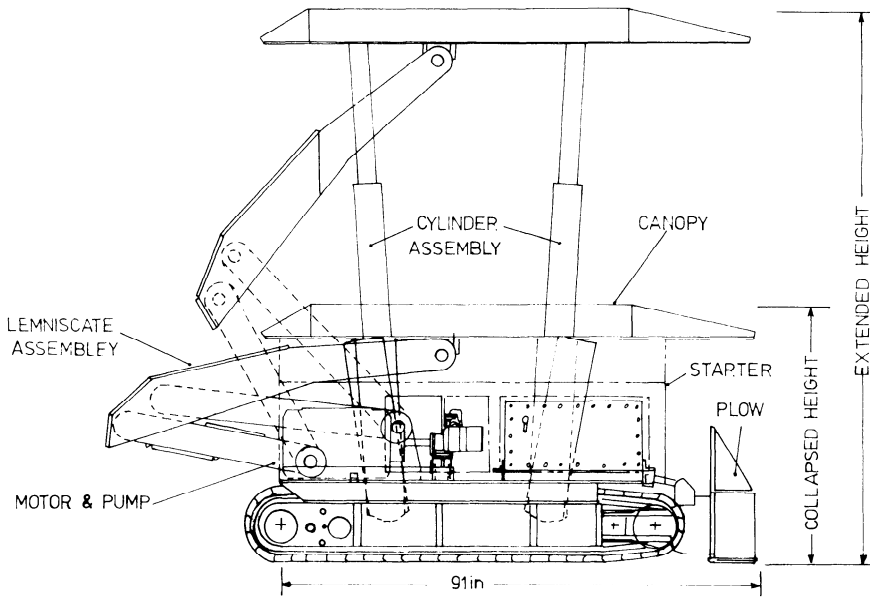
Design features of the mobile roof support. Courtesy of Fletcher Mining Equipment Co. Conversion factor: 1 in. = 25.4 mm.
